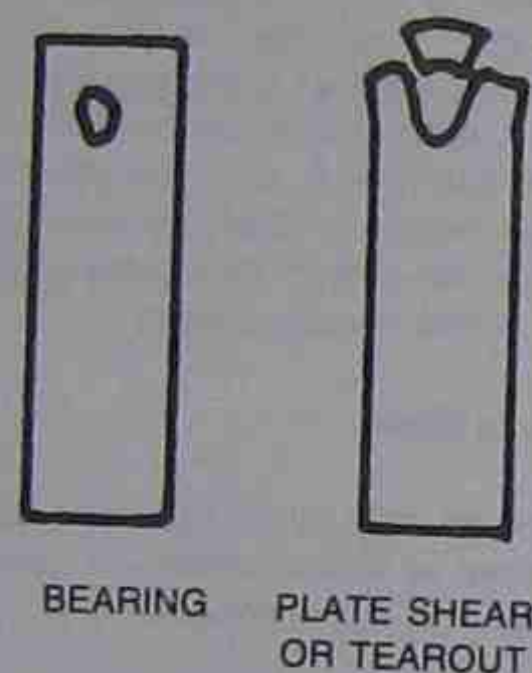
Bearing Failure and Plate Tearout Failure
